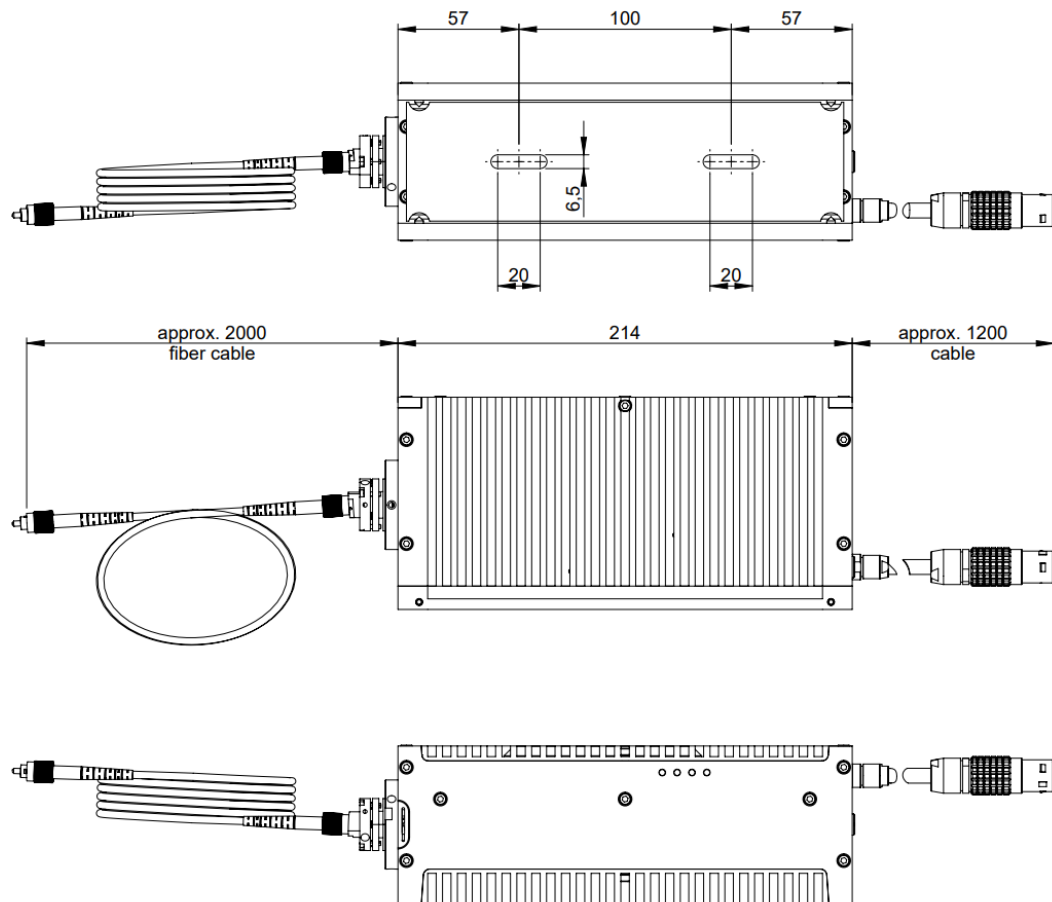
Dimensions of an LDH-FA laser head with bulk housing and fiber
